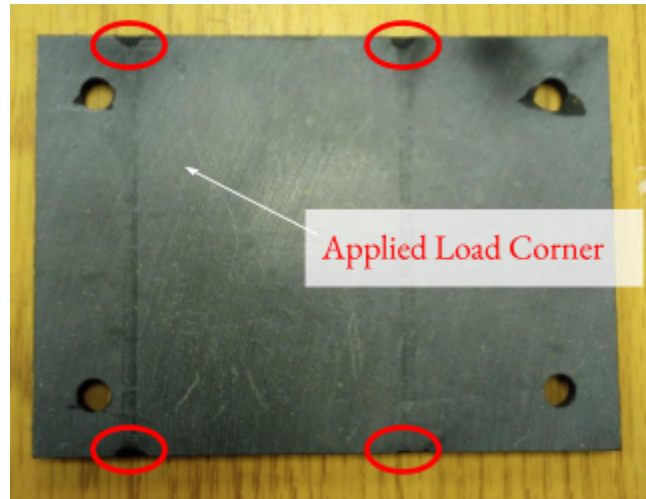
Alumina Insulation Sheet Chipped during corner forming due to warped Build Plate
